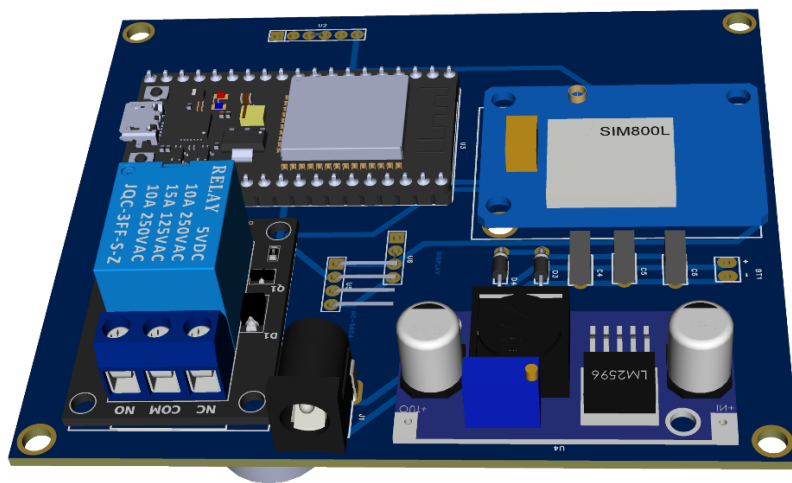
Defining the Printed Circuit Board (PCB) dimensions and outline [55].
